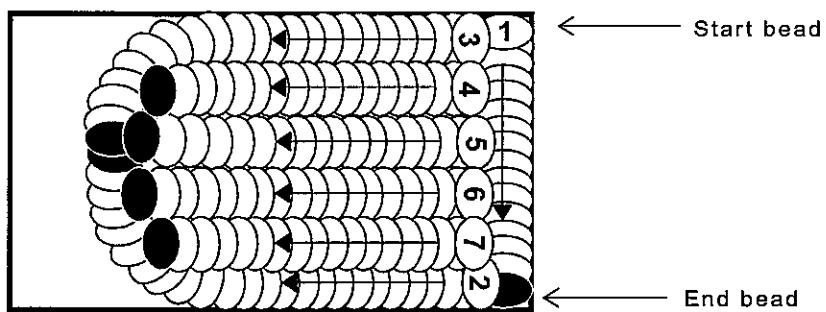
TYPICAL PATTERN OF WELD REPAIR OF RAIL END
